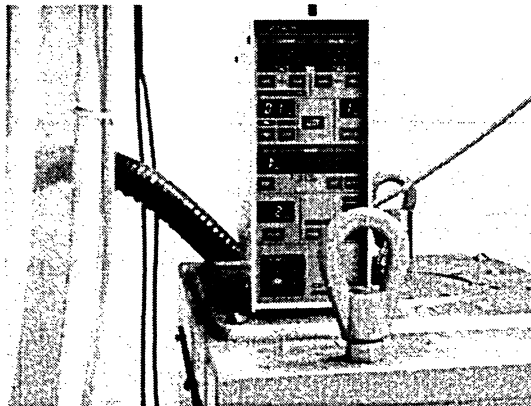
MIYACHI, MM-121B high precision weld checker.
